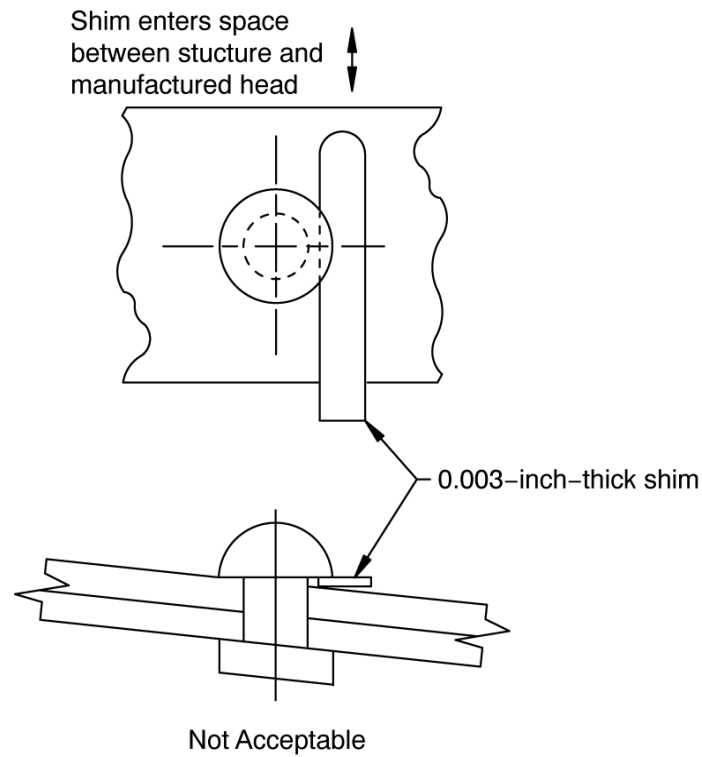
PROTRUDING HEAD GAP CHECKING METHOD
